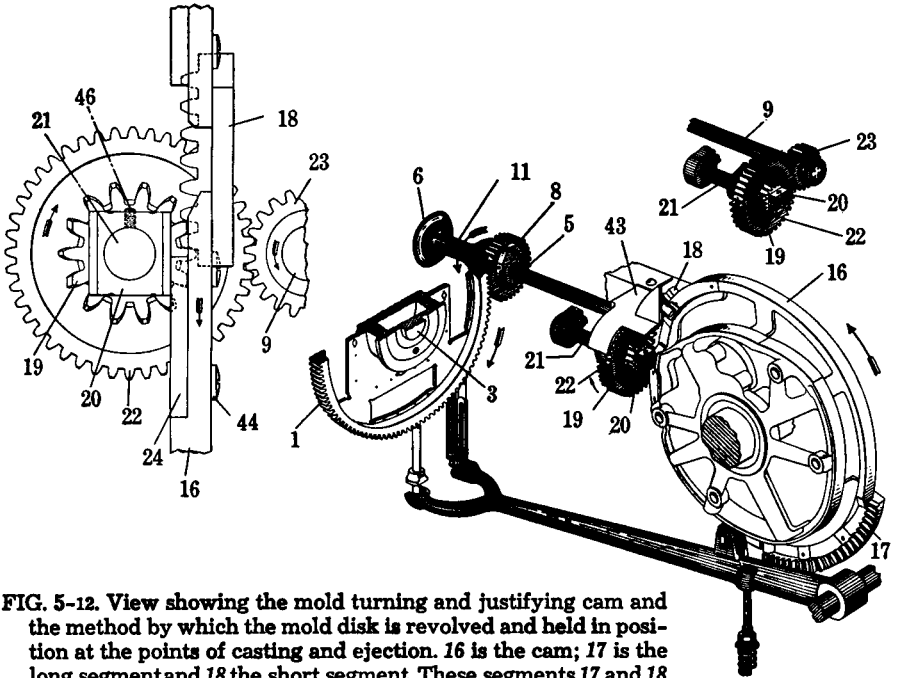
View showing the mold turning and justifying cam and the method by which the mold disk is revolved and held in position at the points of casting and ejection. 16 is the cam; 17 is the long segment and 18 the short segment. These segments 17 and 18 are portions of a circular bevel gear fastened to the cam 16 and at the proper time engage the bevel pinion 19.
